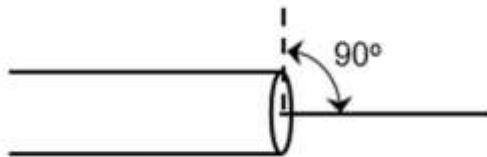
Ideal surface geometry of spinal rod after it has been cut
